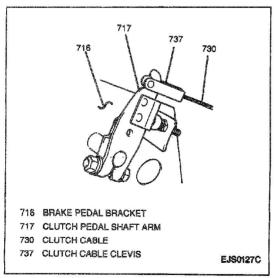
Clutch Cable Clevis at Clutch Pedal Shaft Arm
